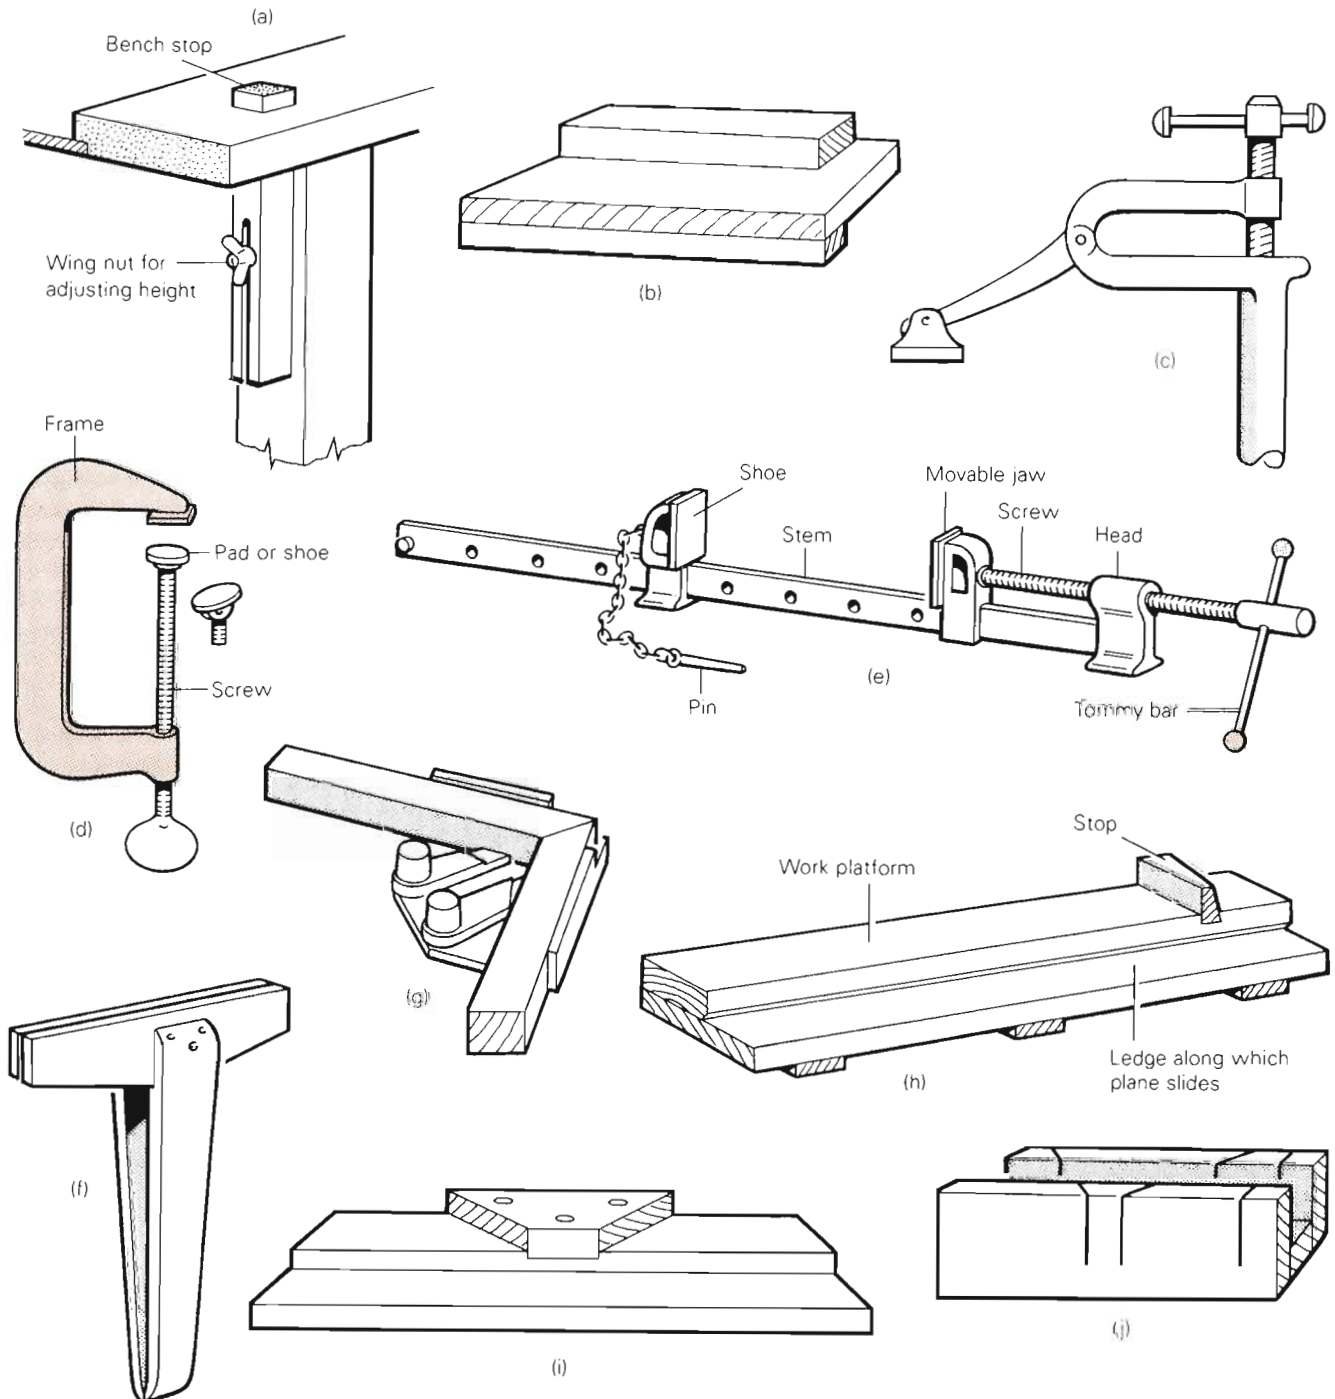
Holding and supporting devices: (a) bench stop, (b) bench hook, (c) holdfast, (d) 'G' clamp, (e) sash cramp. (f) saw cramp, (g) mitre cramp, (h) square shoot, (i) mitre shoot, (j) mitre box.
